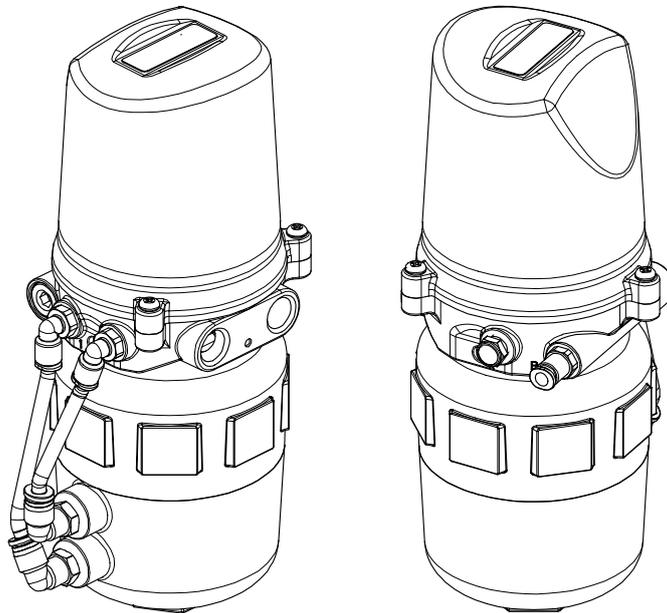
Double Acting Actuator Pneumatic Piping Example
